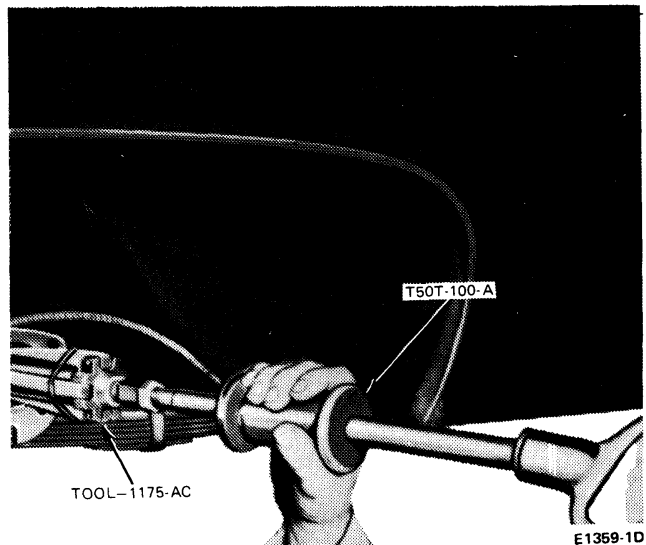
Removing Oil Seal—Dana Model 44—Semi-Float Axle
